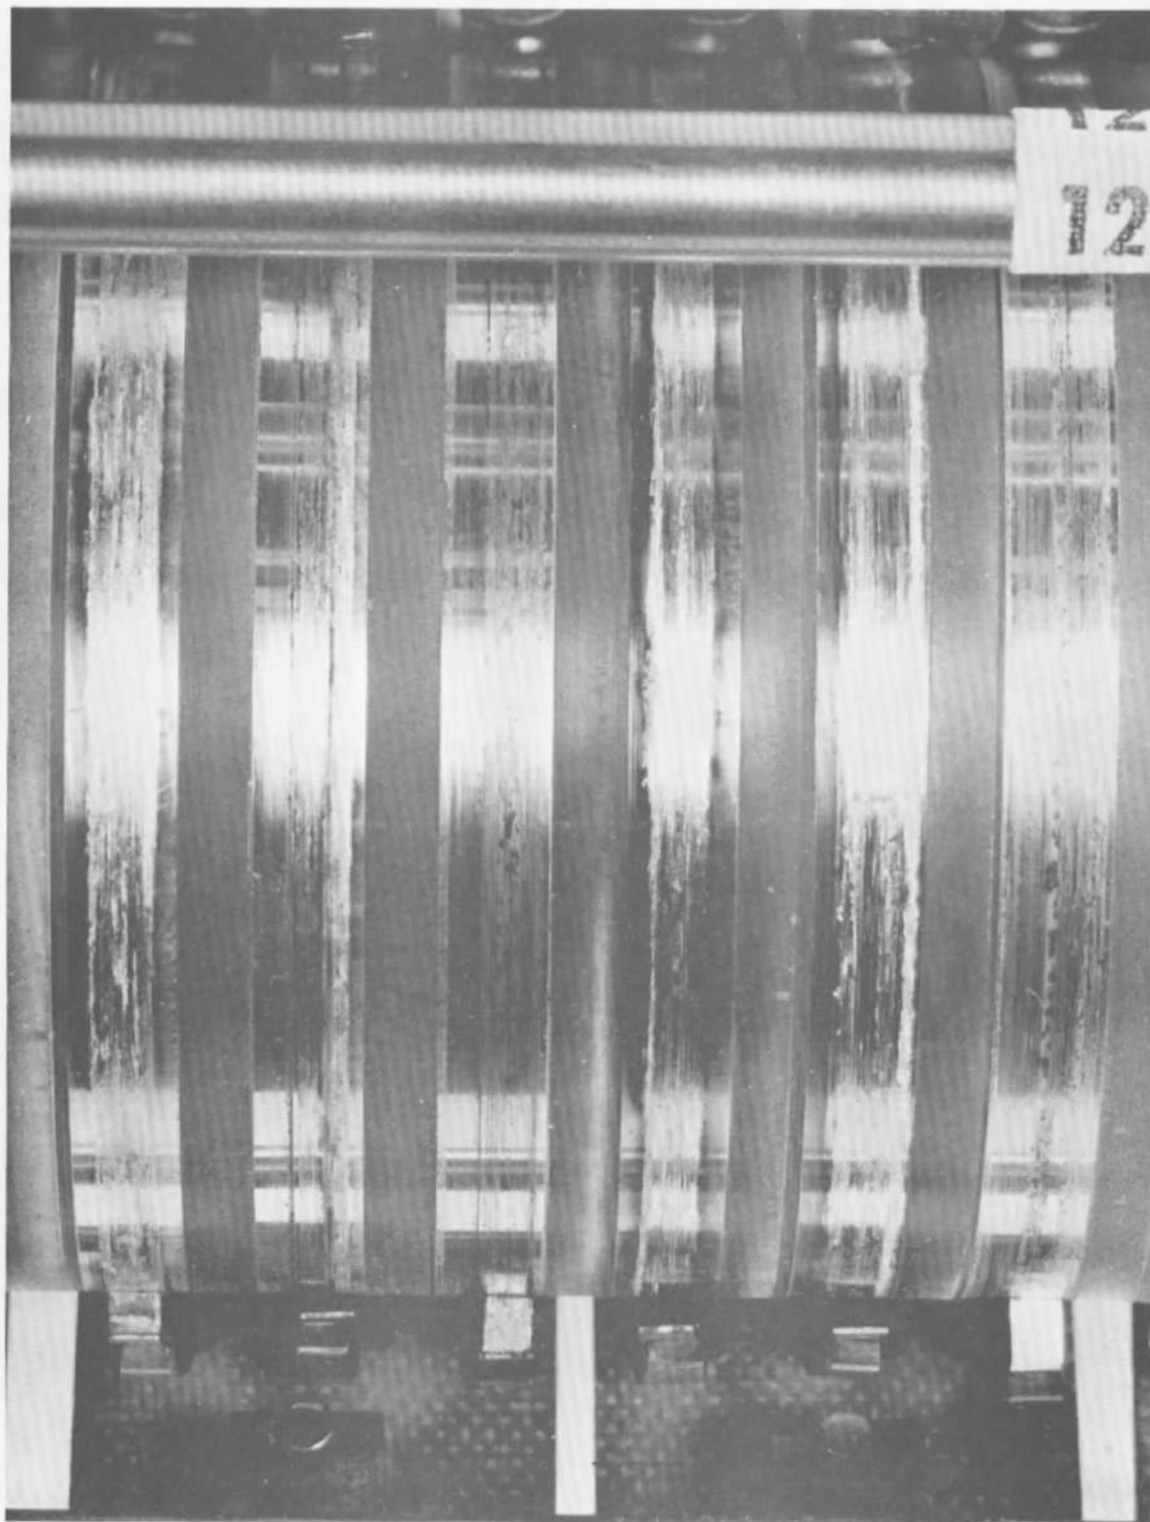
Detail at Positions 7 Through 12 of Assembly 2 After Testing
